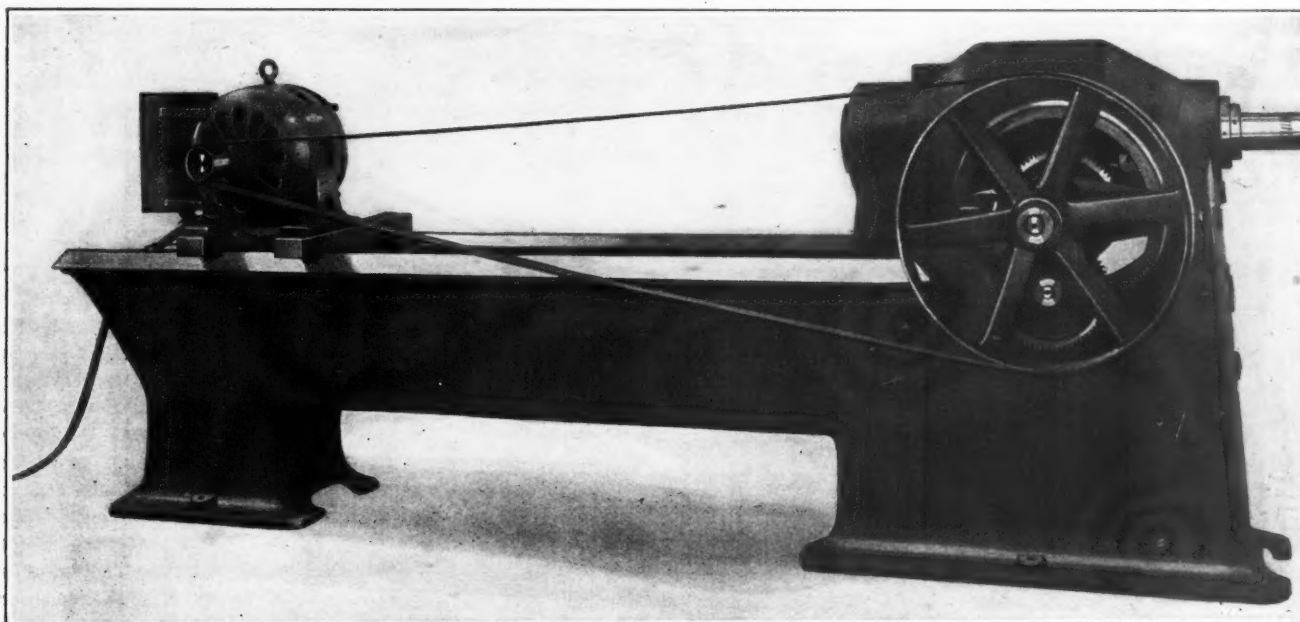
Portable Tool for boring and facing Bearings for Case containing Speed Change-gears—Bearings at Opposite Side of Head are bored and faced simultaneously
